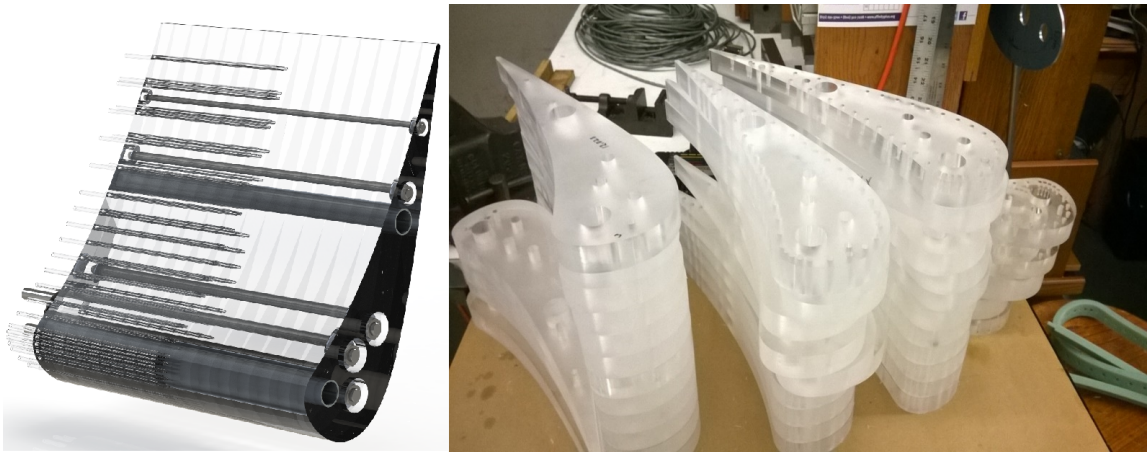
Vane assembly with the vane slabs (Left) Model, (Right) During assembly [51]
